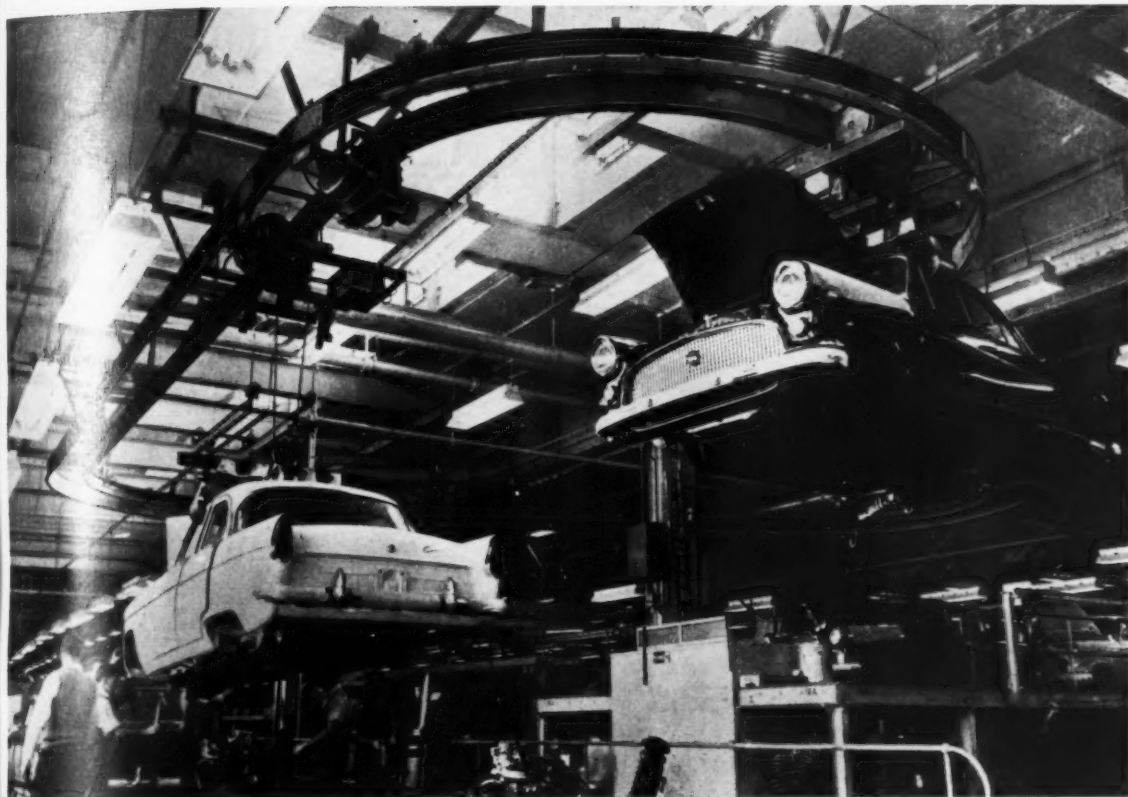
7-bar Trolley-master with covers removed on motor car body handling at the Ford Motor Co., Ltd.
